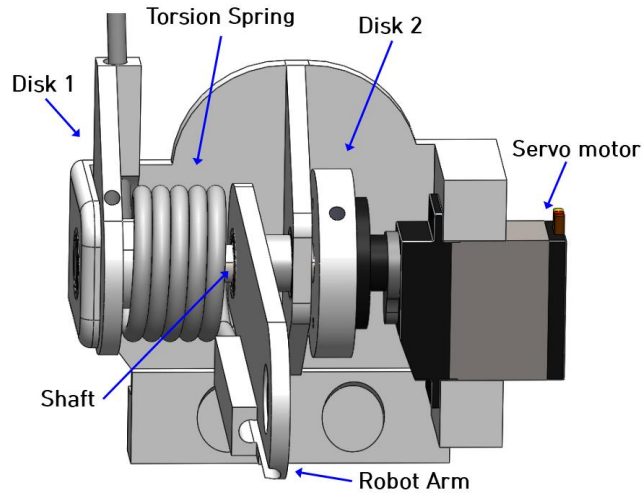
Type A SEA: Consists of a servo motor, a torsion spring, a D-profile shaft, 3D printed disks, and a robot arm.
